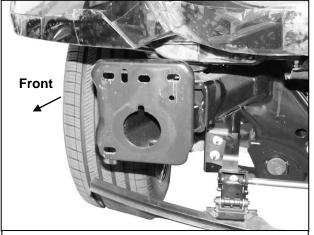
Remove the inner plastic cover attached to the outer end of the bumper and outside of the frame (Driver/left side pictured)
